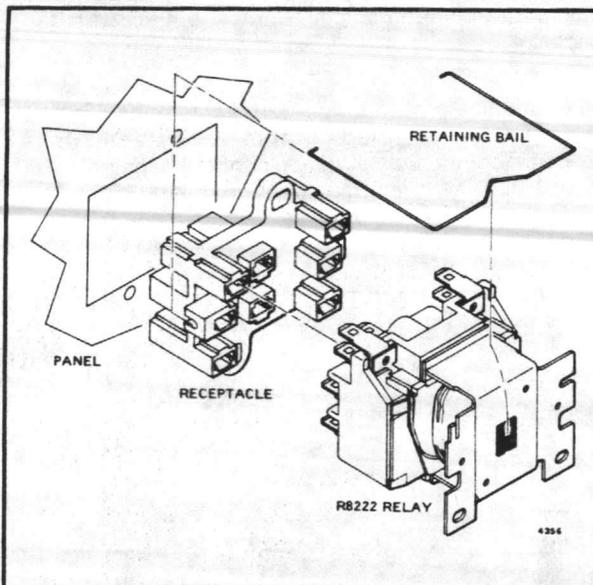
RELAY MOUNTING USING RECEPTACLE AND RETAINING BAIL.
